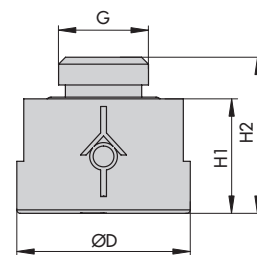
Check valve (1790-7253 and 1790-9646)
